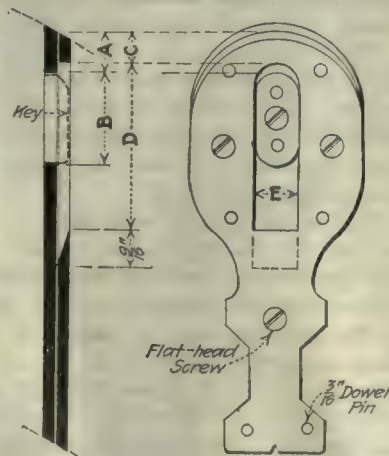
STEEL PLATES FOR ENDS OF CORE SECTIONS
